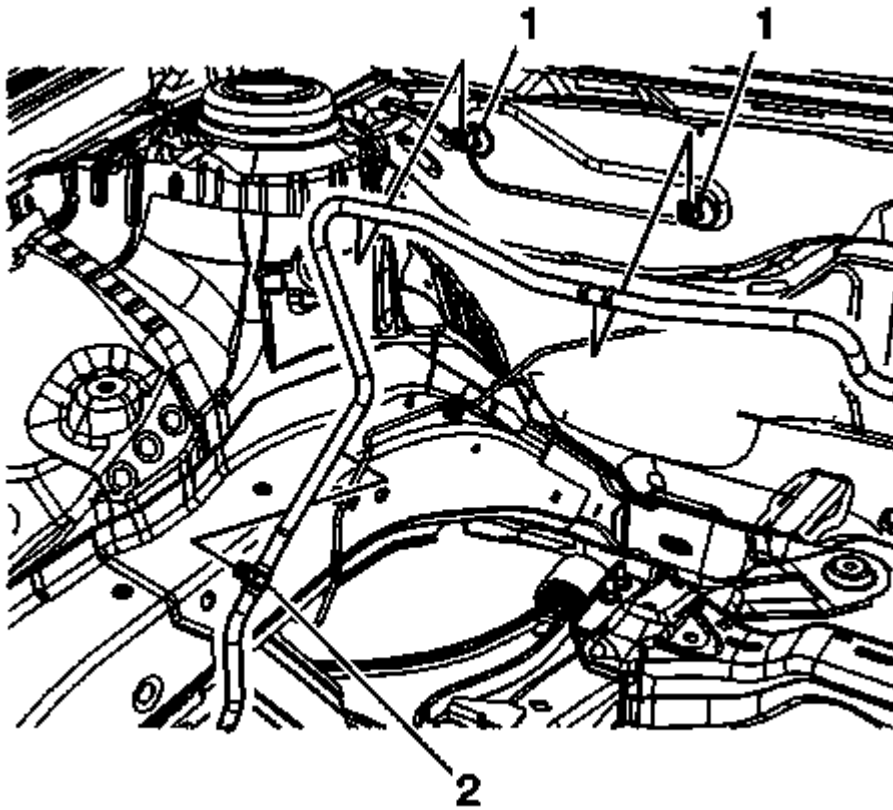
Power Brake Booster Vacuum Rear Pipe Retainers
